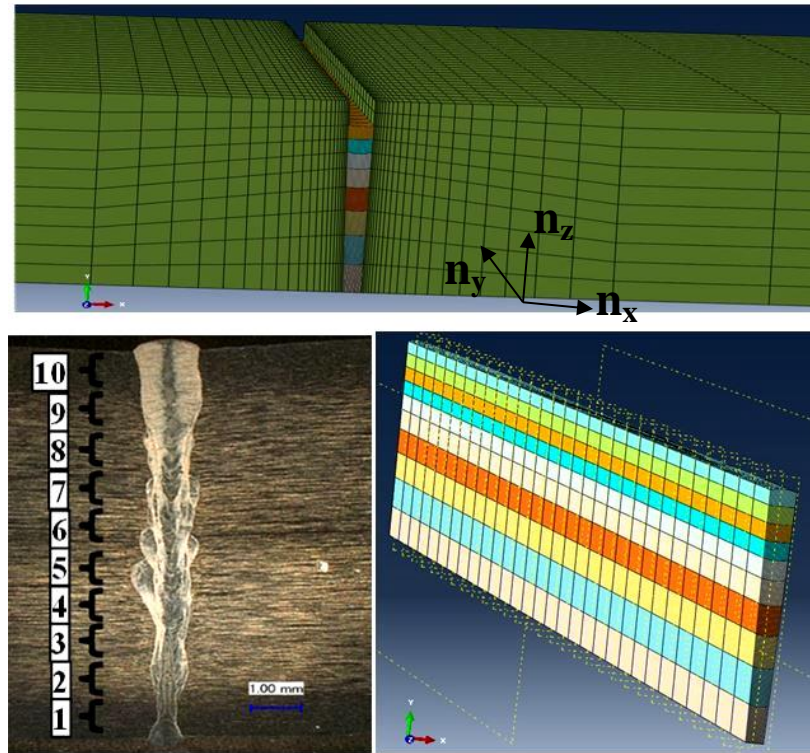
Modelled, and real weld bead cross section for NGLW 10 mm thick plates
